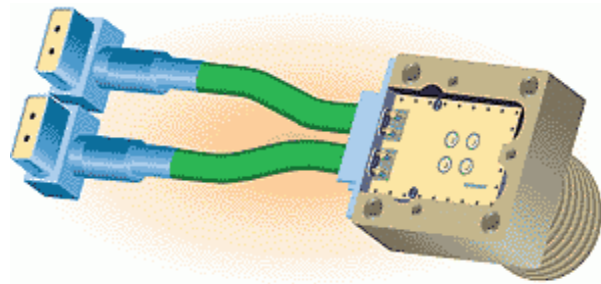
A fully compensated size 11 single quadrax assembly split into two twinax cables with rear cover removed.
